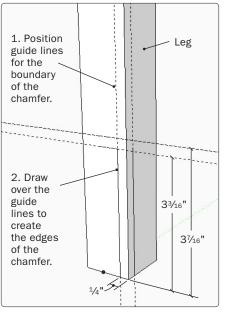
Zoom in close to the bottom of the leg and begin drawing the chamfer.
